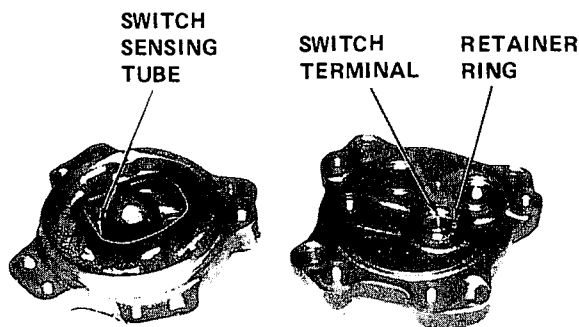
B-25 Superheat Shutoff Switch Installed in Rear Head - 6 Cylinder Compressor
